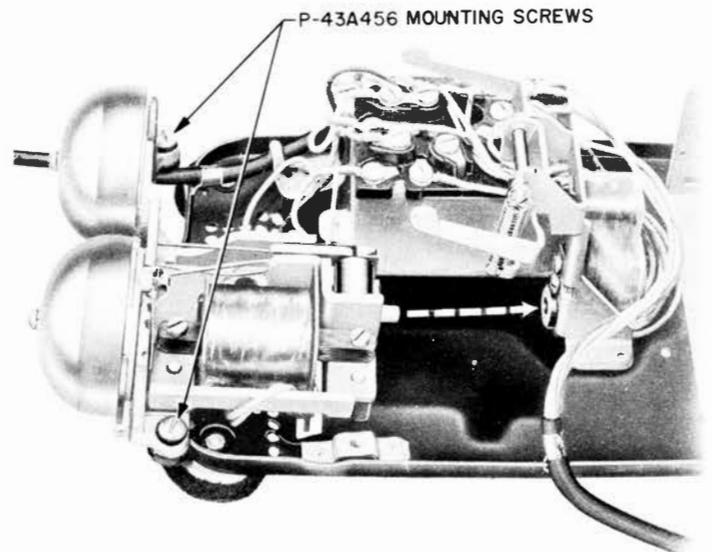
554-Type Housing with 95B Apparatus Blank, Interior
